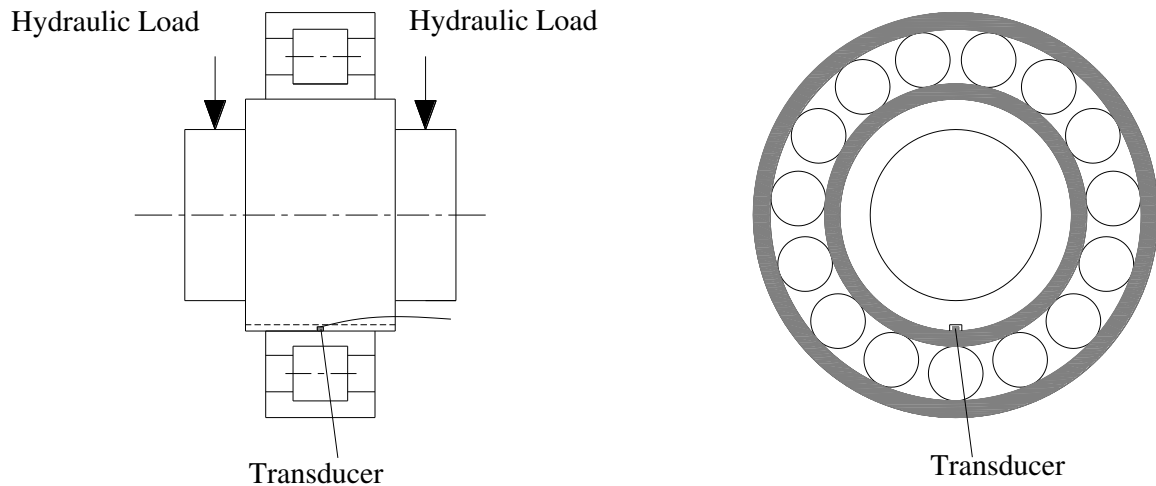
Schematic of the cylindrical roller bearing and transducer location
